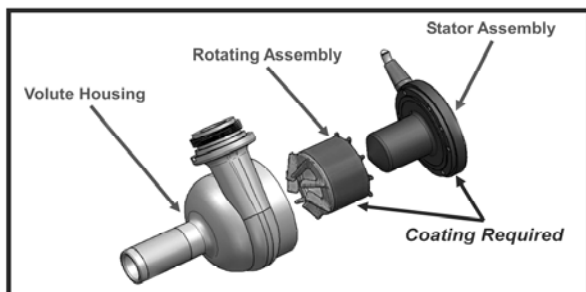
Depiction of an LVAD subassembly. RVADs differ only in RA impeller and in volute housing design.
